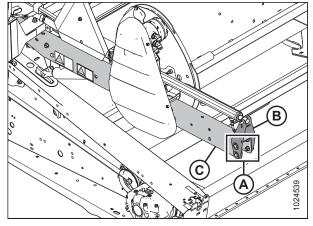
Right Reel Arm Cylinder in Forward Position
